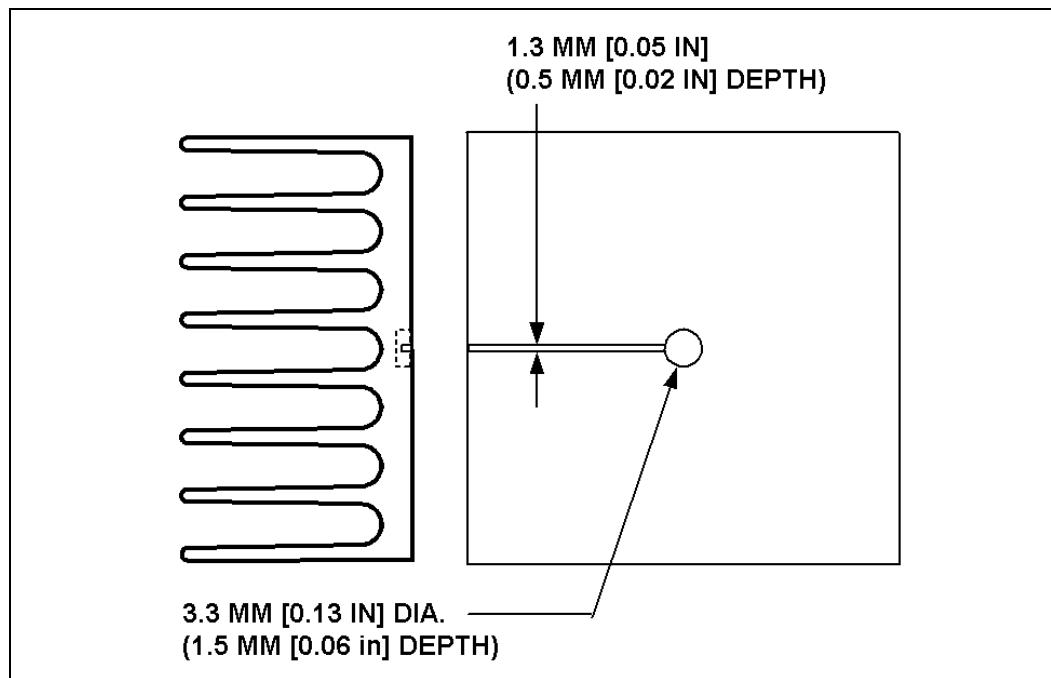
0° Angle Attach Heatsink Modifications (generic heatsink side and bottom view)
